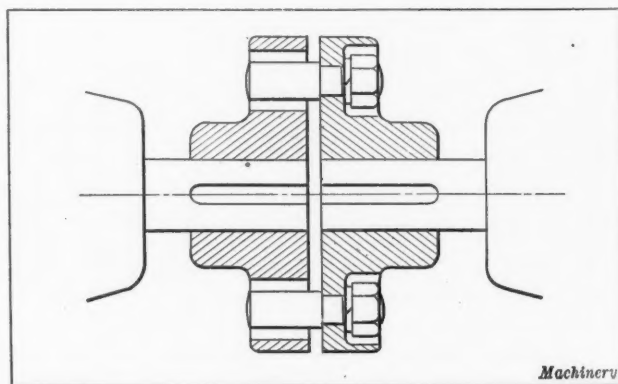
Design with Pins engaging Hubs provided with Bushings of Fiber, Leather, or Rubber
